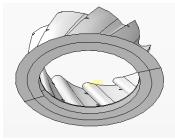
Combination Tool, Smooth Circular Blade and Ten Helix Chipper with CZ10 Chipbreaker.
